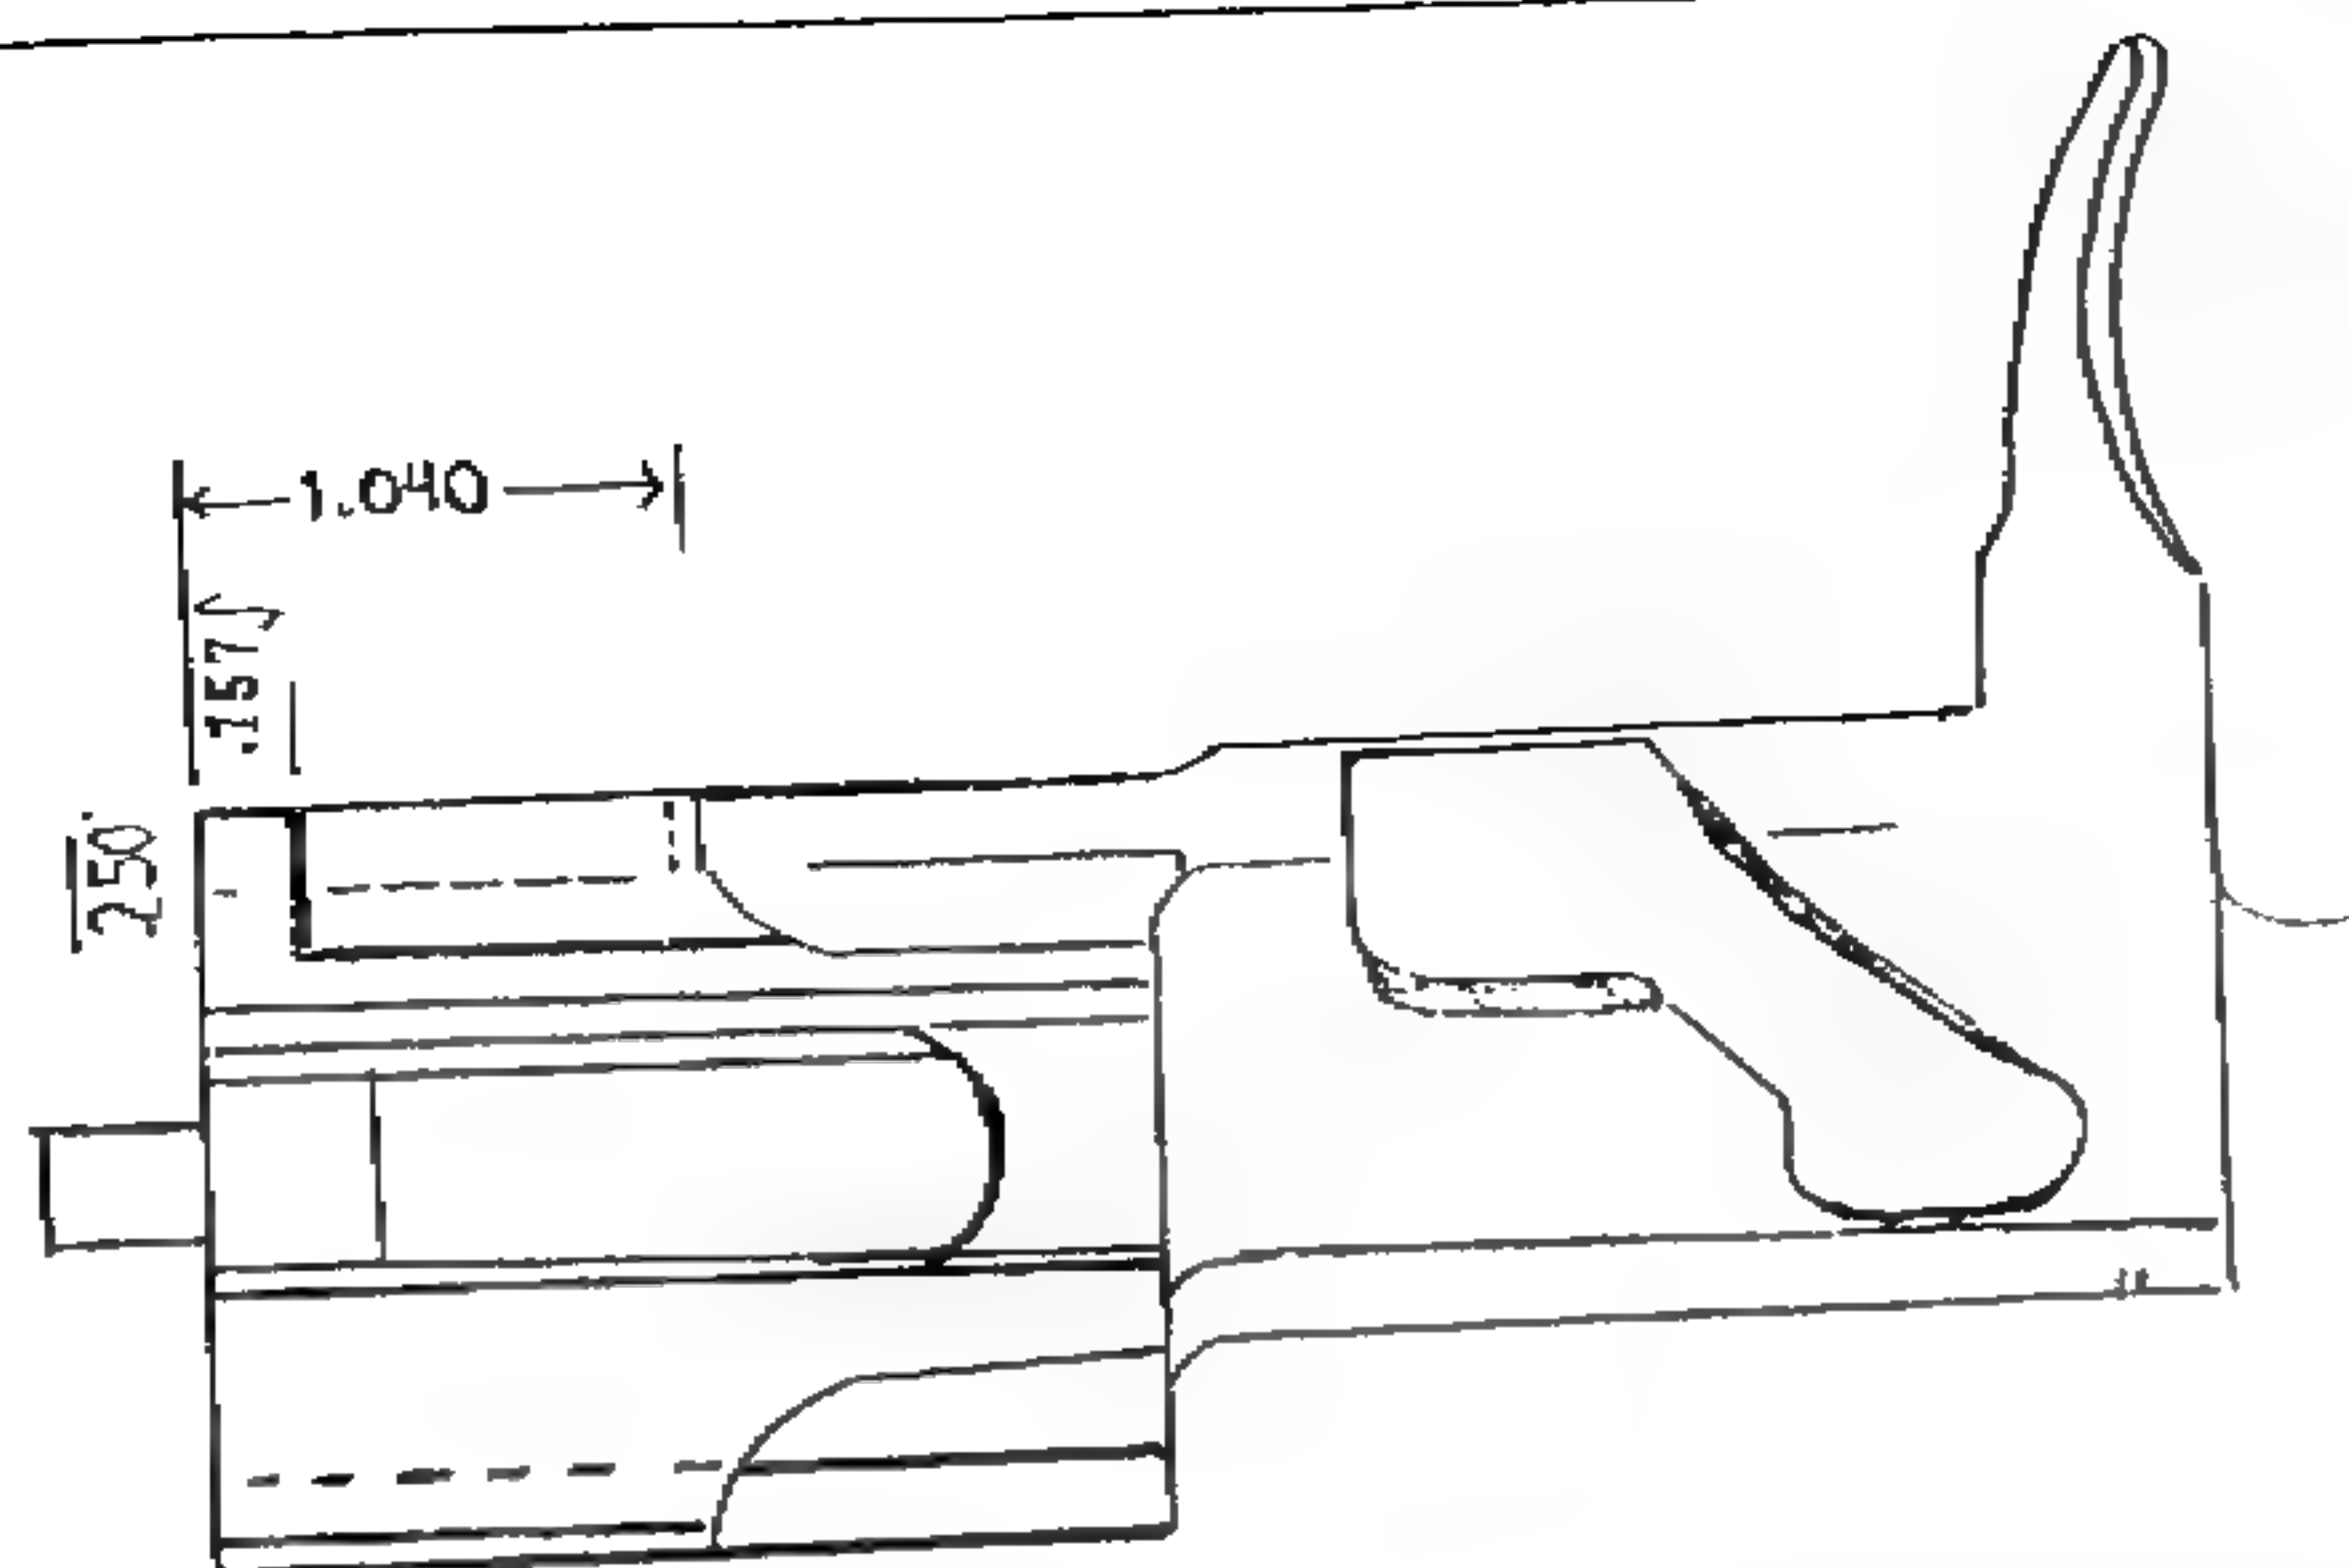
B Bottom view of a full auto bolt carrier. The darkened area with dimensions is the automatic fire cam surface.
